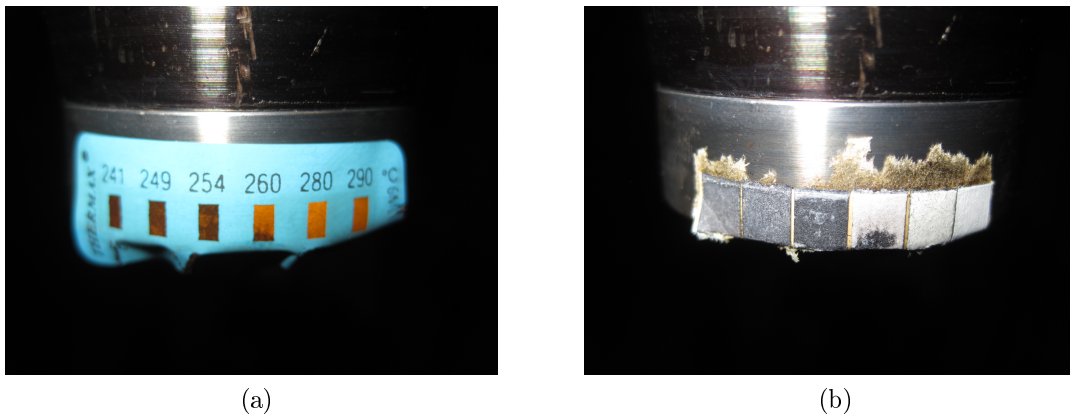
Blackened indicator strip applied to the tool's shoulder after the welding process for TM3 test in position 2
